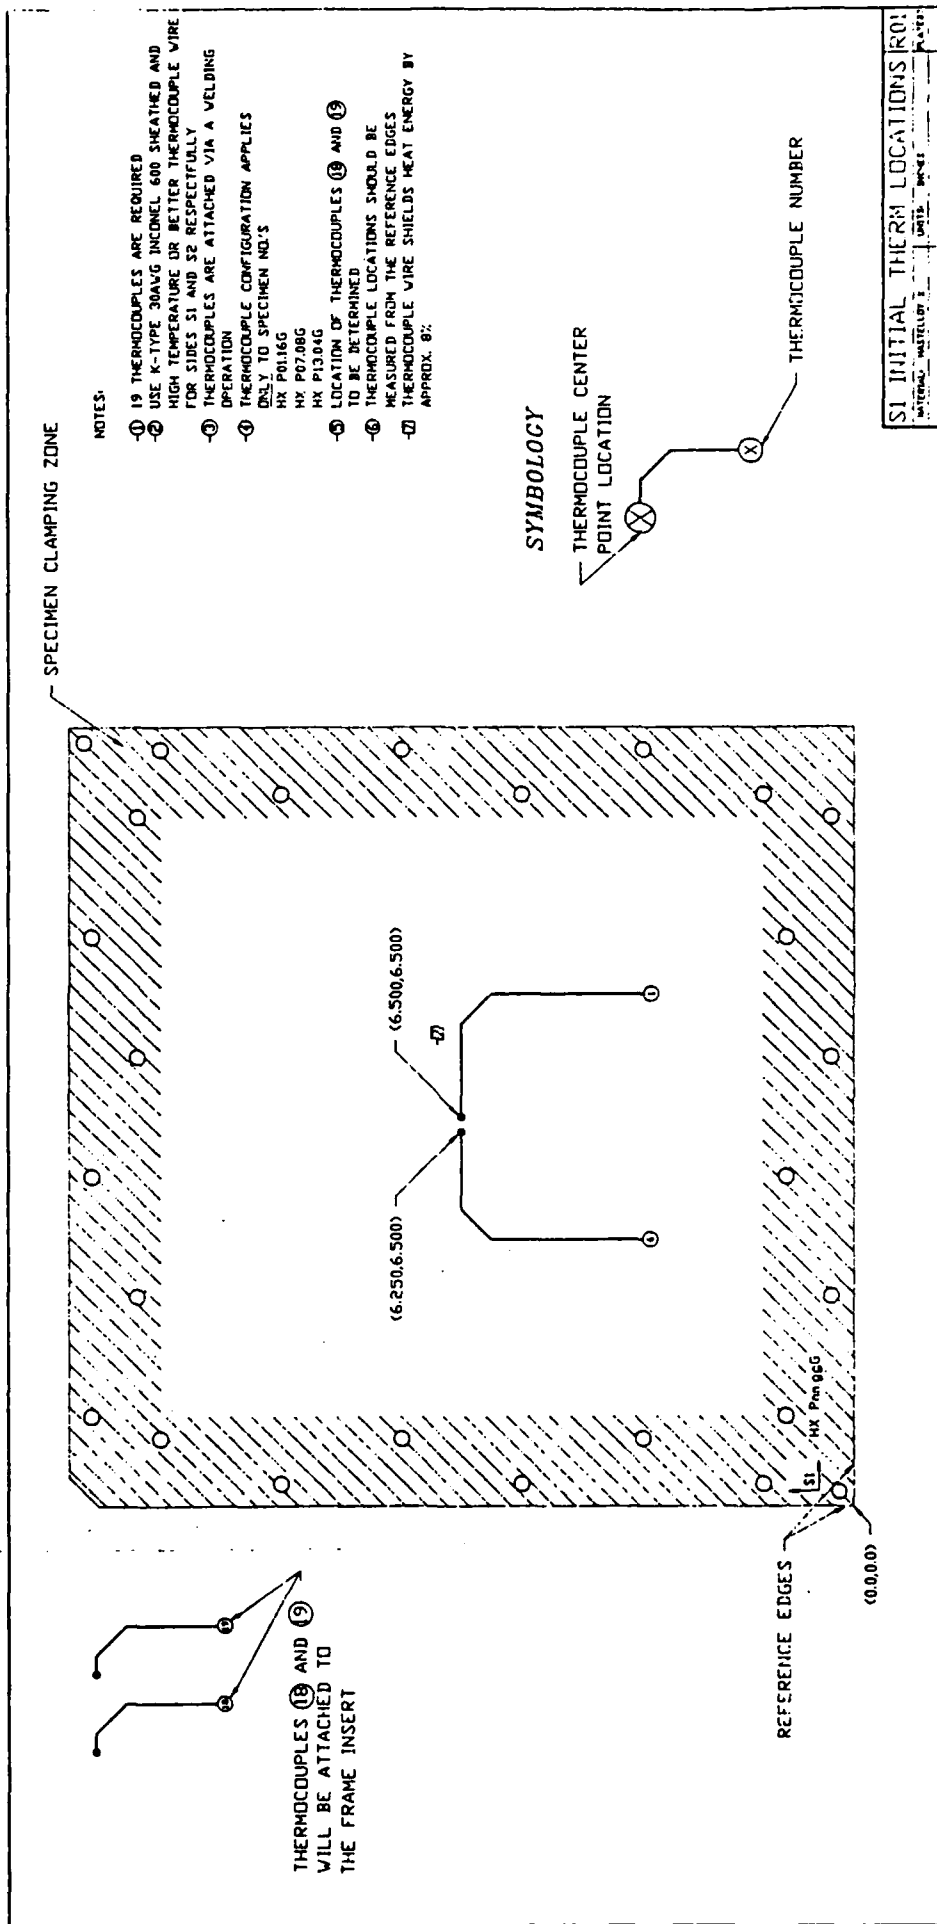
Thermocouple Locations on the Laser Irradiated Side of the Specimen
